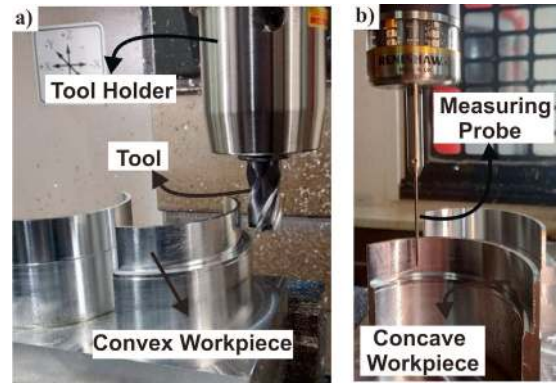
Experimental Setup: (a) Machining Setup; (b) Measurement Setup
